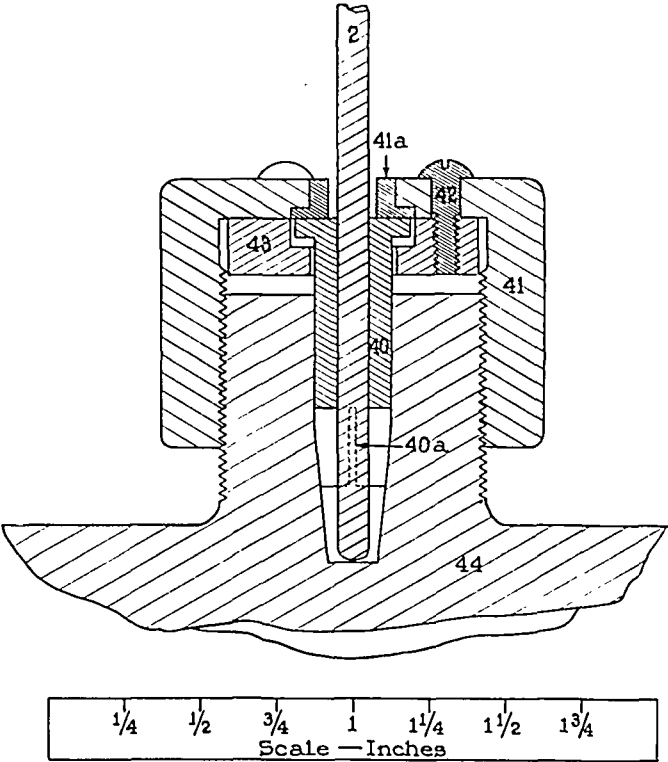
Vertical cross-sectional view of the rotor chuck arrangement.
